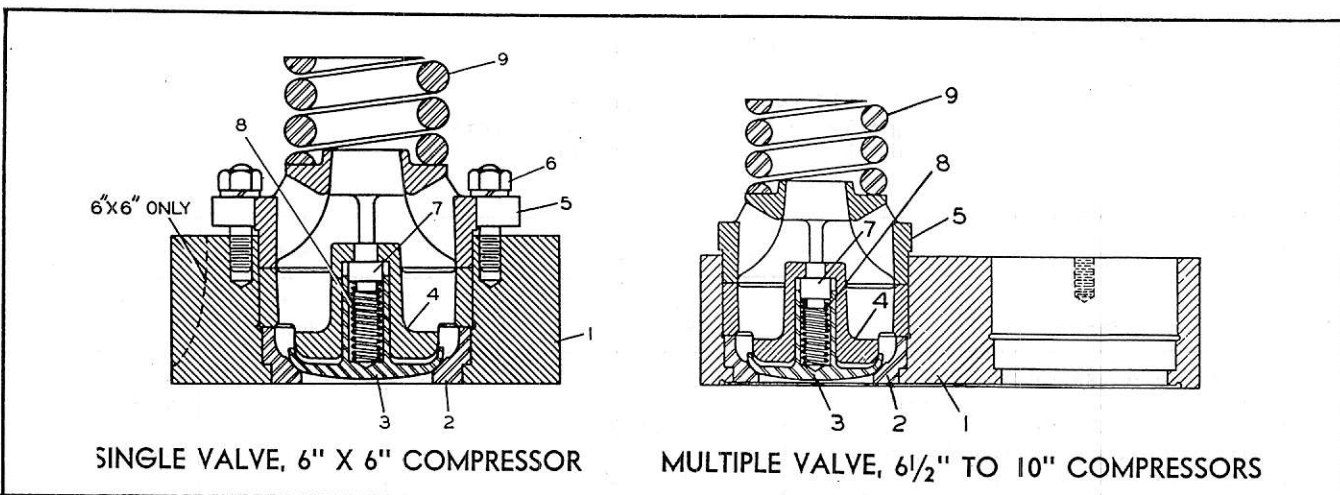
Discharge Valve, Y-27 Type - 6" to 10" Compressors
